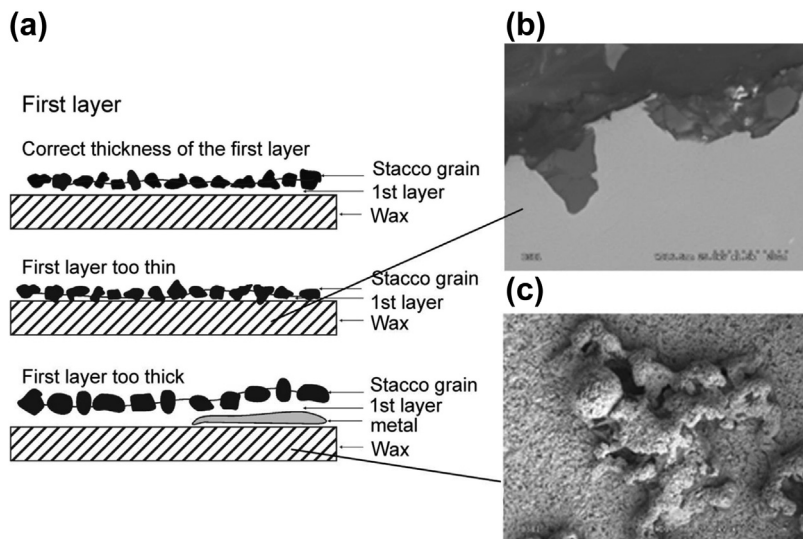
Defects arising from improper thickness of the first layer: (a) construction scheme of the defects mechanism, (b) ceramic grains in the casting, (c) the surface of the casting with ceramic "accretions."
